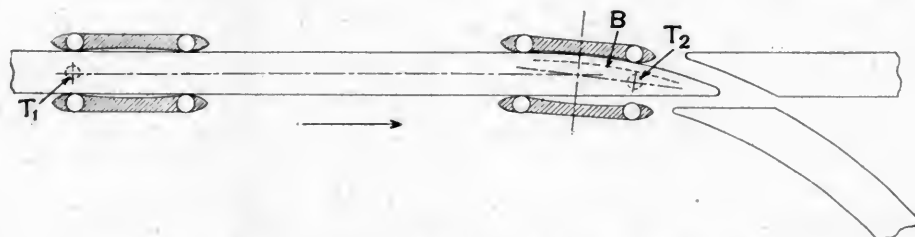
Section Through Truck Side Frames at the Lower Flange of the Track I-Beam, Showing a Right-Hand Switch
